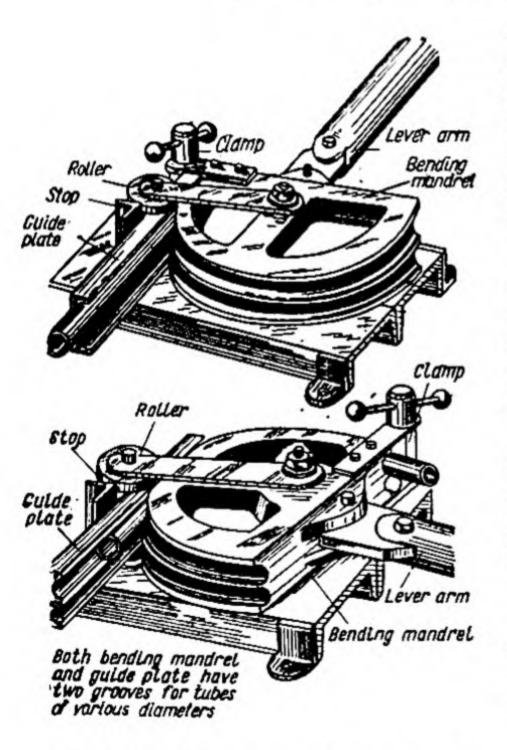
Hand-operated pipe-bender for thin-wall steel tubing.
